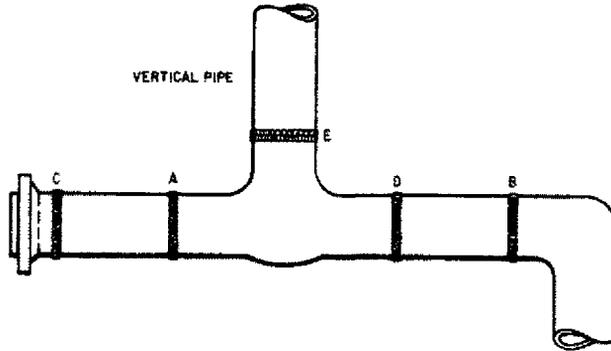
Correct welding sequence for welding the root beads of the pipe assembly.
